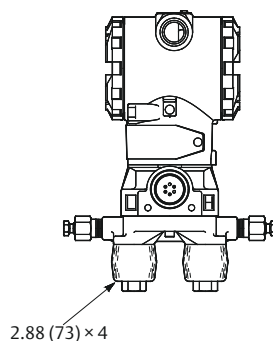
Coplanar Mounting Bolts and Bolting Configurations for Coplanar Flange
